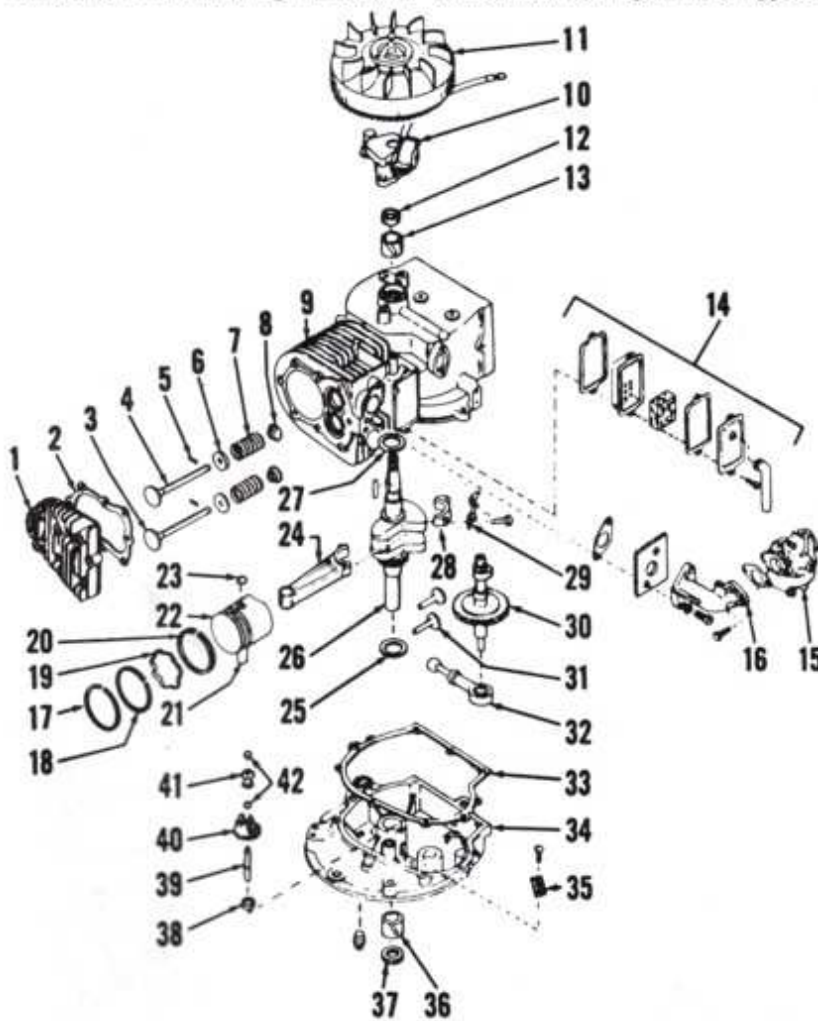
Exploded view of vertical crankshaft engine typical of Models VH70, VM70, VM80 and VM100. Renewable bushings (13 and 36) are not used on Models VM70, VM80 and VM100.
